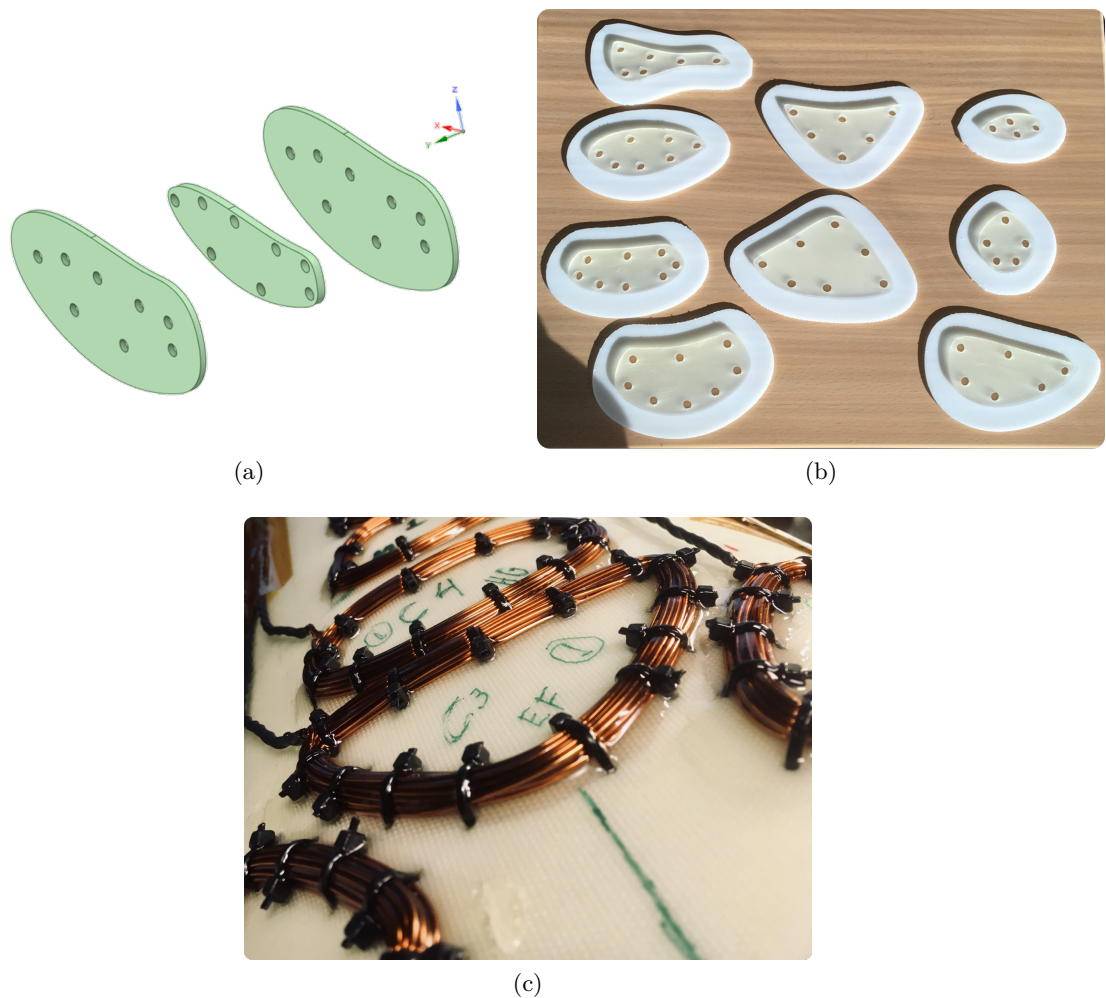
CAD model of a particular winding mold (a), 3D printed winding molds (b) and the resulting windings (c) after epoxy coating.
